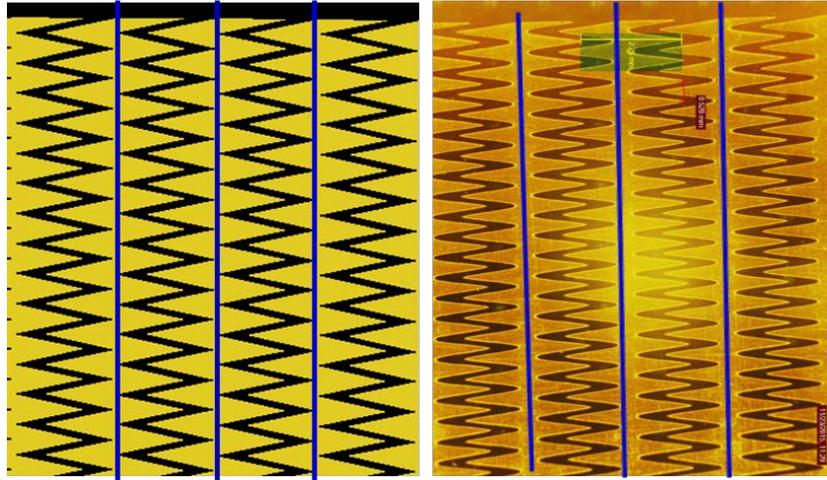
Left*: Zoomed view of a few readout strips in our original zigzag design. *Right*: Actual zigzag strips produced by a PCB factory. Blue lines indicate strip centers.
